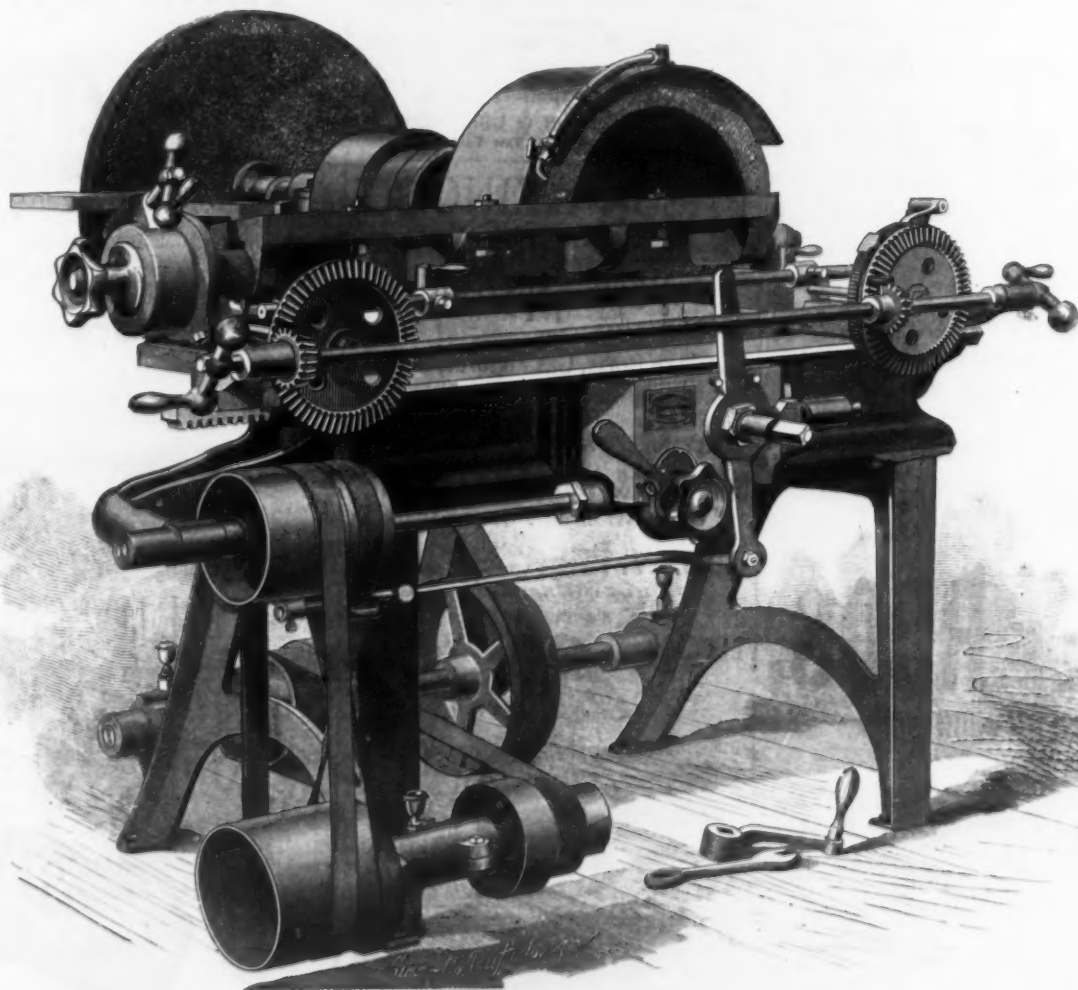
Tub Wheel Automatic Knife Grinder.
